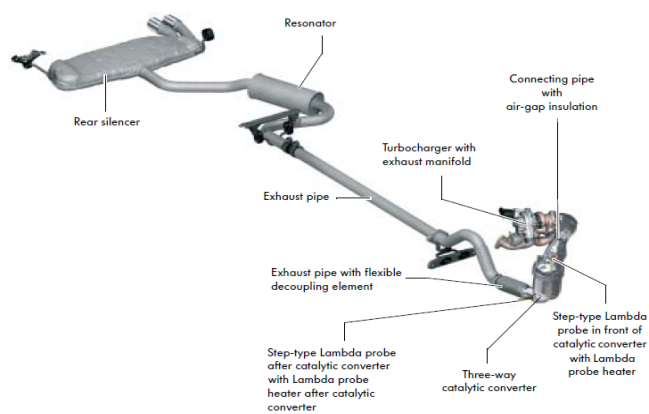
Exhaust system in 1.8 TSI engine [5]
